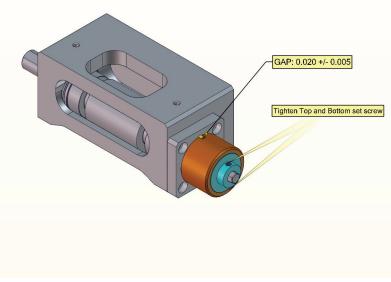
Installing the Drag Clutch with Proper Gap on Shaft
